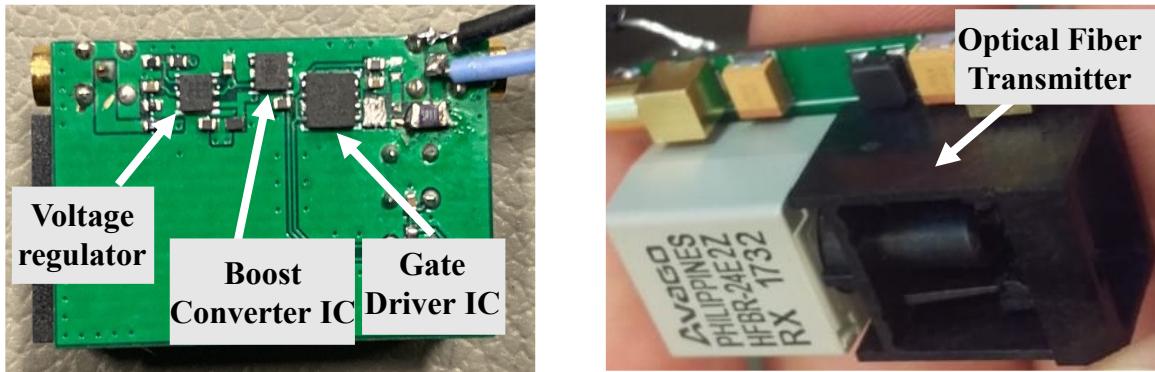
HV Optically isolated Gate Driver (17 X 12 mm) (L) Bottom Side PCB (R) Top Side PCB
